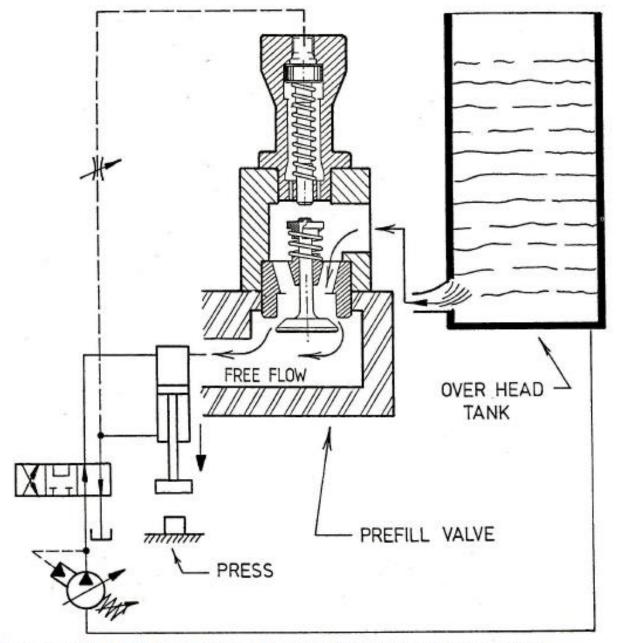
Pilot operated check valve used as pre-fill valve in a press circuit
